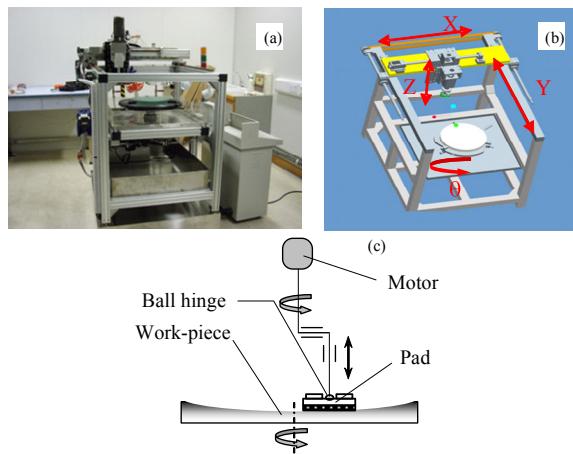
Photograph (a) and movement representation (b) and schematic illustration of sub-aperture pad machining (c) of the new CNC machine
